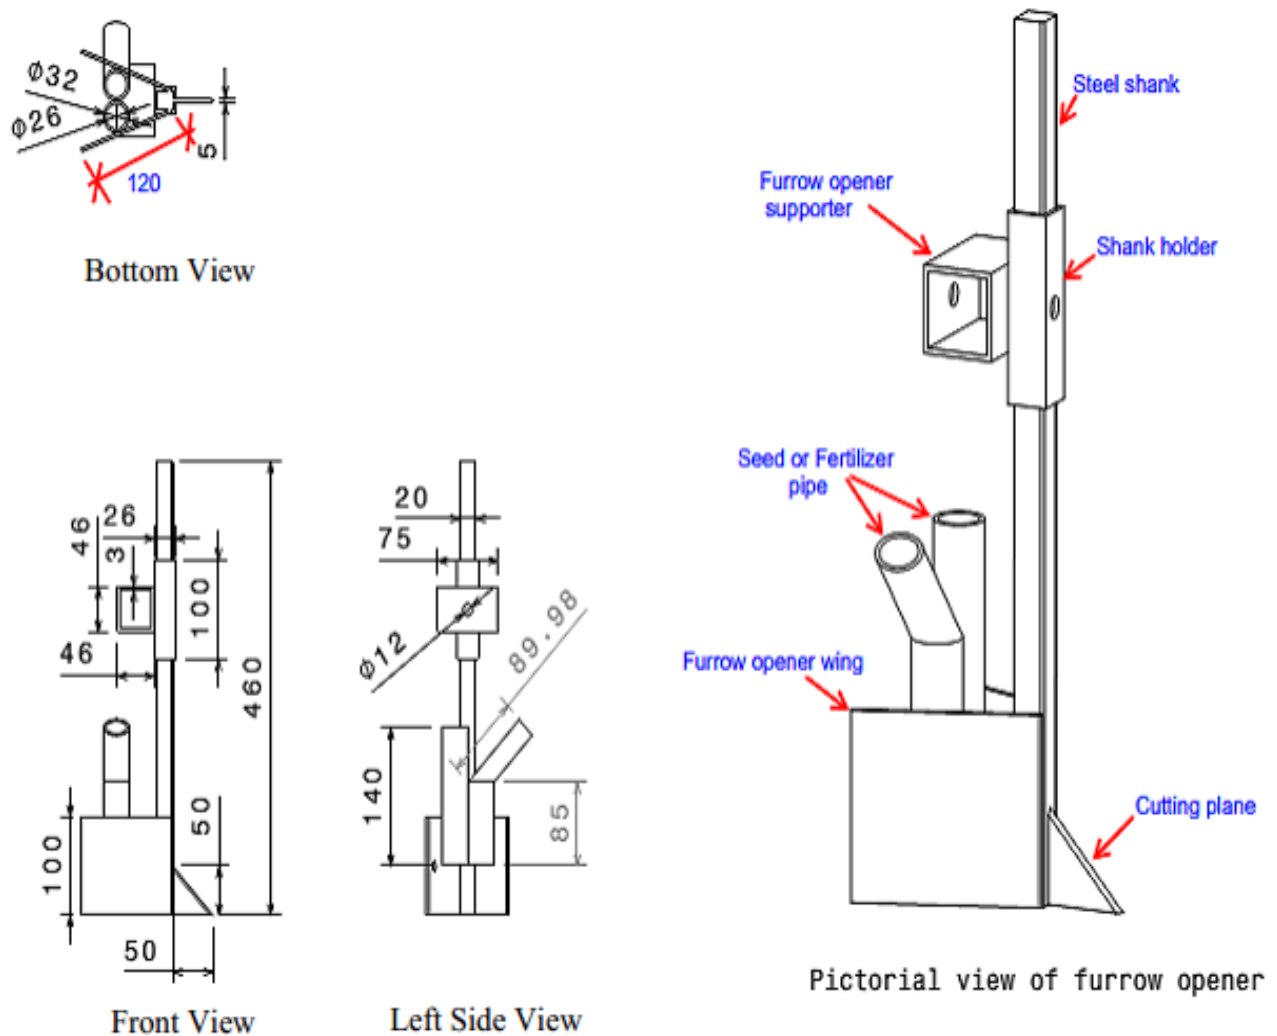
Adjustable furrow opener of the prototype planter (dimensions are in mm)
